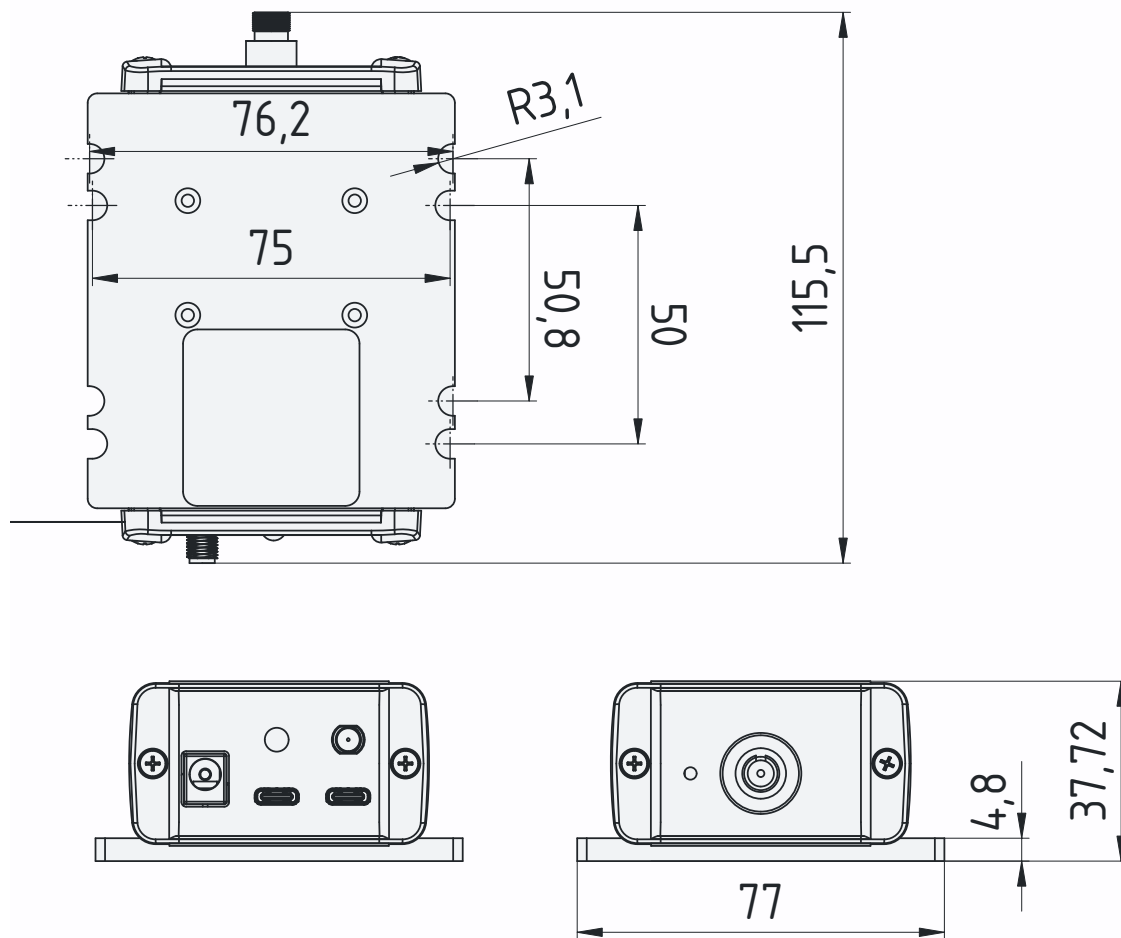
Technical drawing of the Single Photon SPAD Detector.
